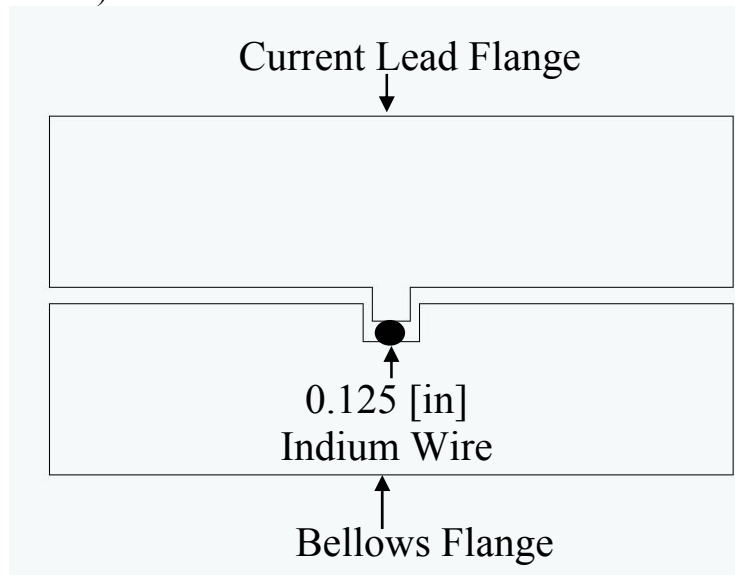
Tongue-and-Groove indium seal used on current lead flange.
